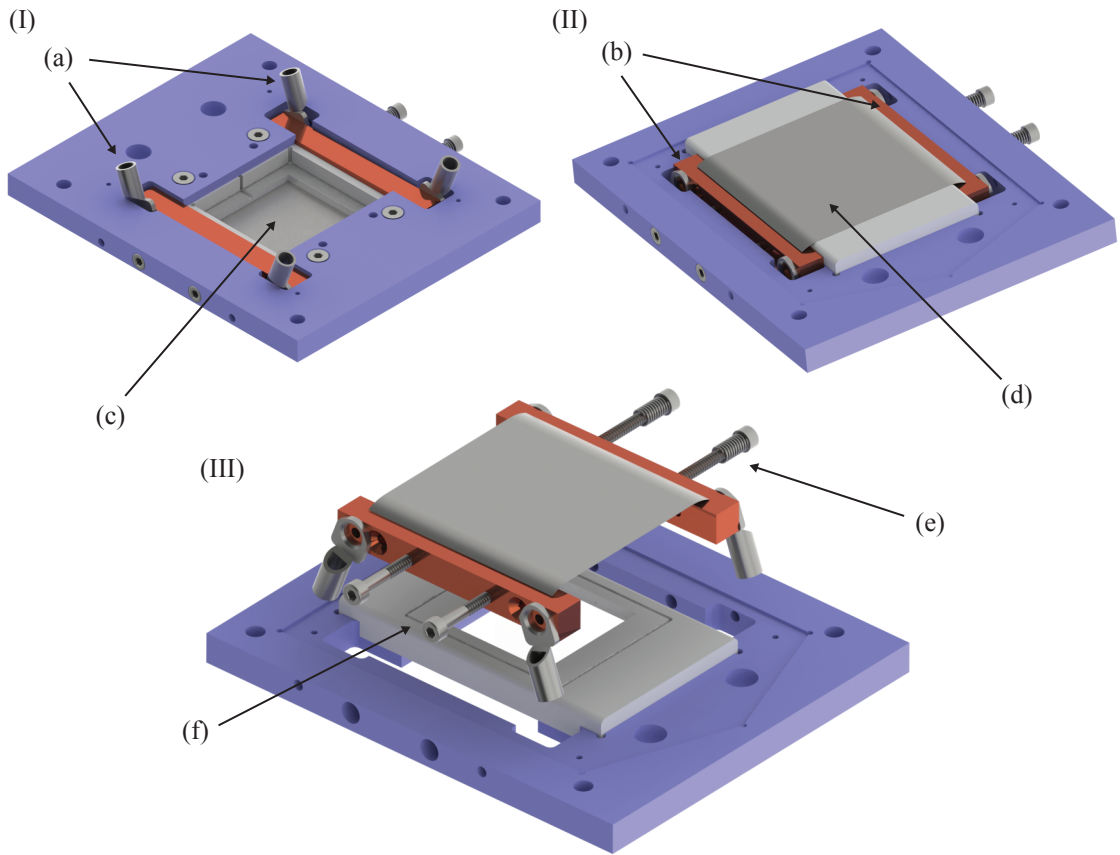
Heated surface assembly. (I) upper view, (II) inverted view and (III) exploded inverted view. (a) Power supply connections, (b) copper bars, (c) infrared transparent glass, (d) Constantan foil, (e) foil tensioning springs and (f) foil seal.
